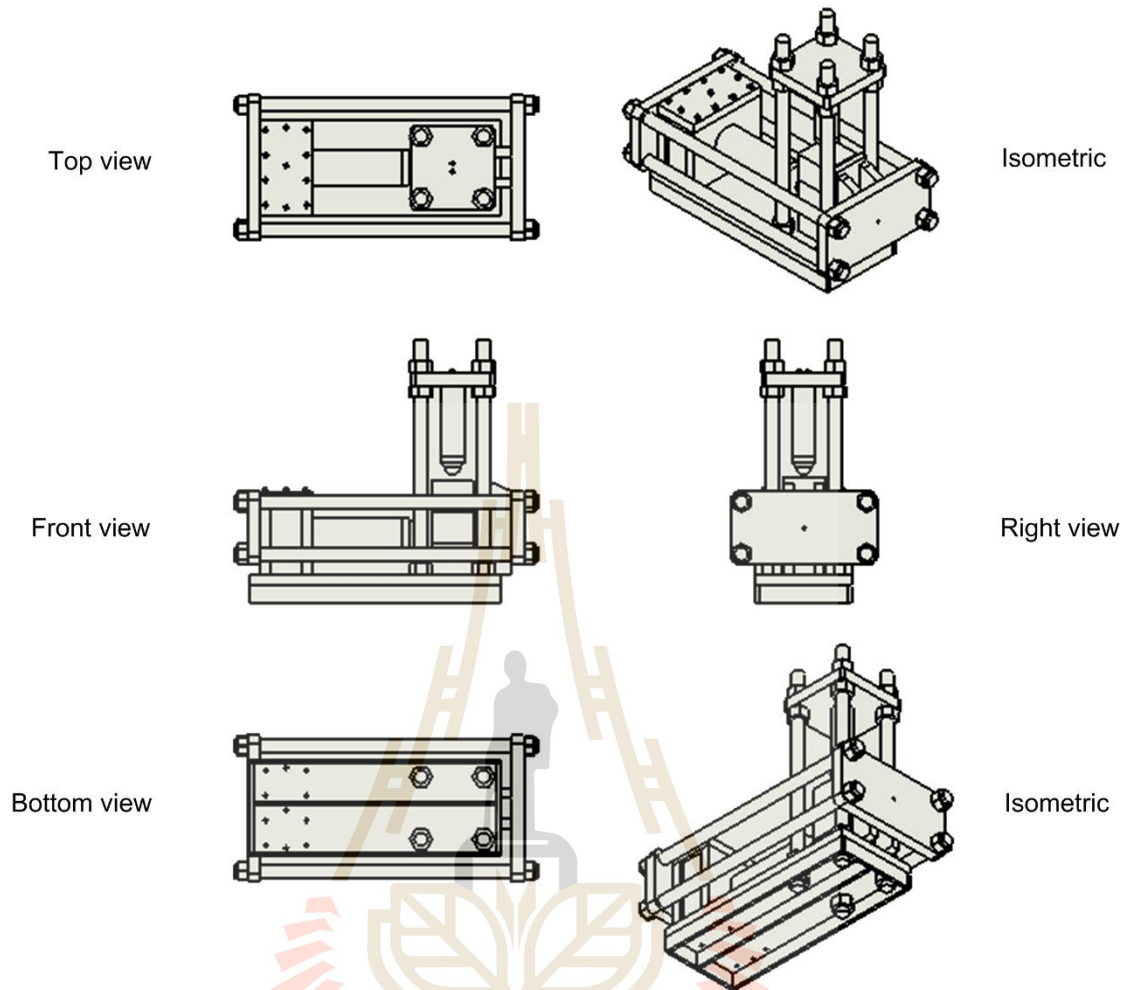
Two steel cross load frames (horizontal axial and vertical axial load frames) with multi-views section.
